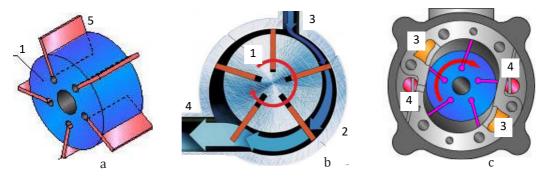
Design of rotary motors of general purpose: a – rotor; b – single-chamber motor; c – two-chamber motor.
